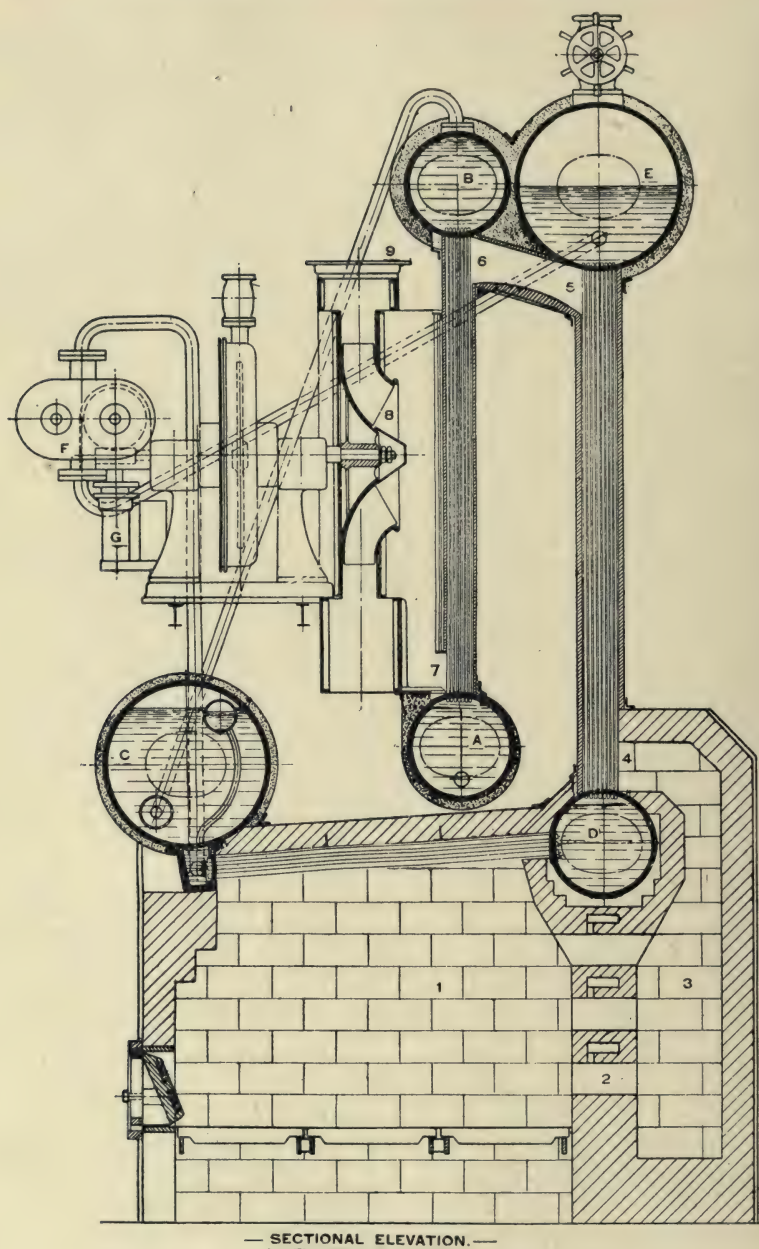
Dr. Nicolson's design for a "high-speed" boiler.
